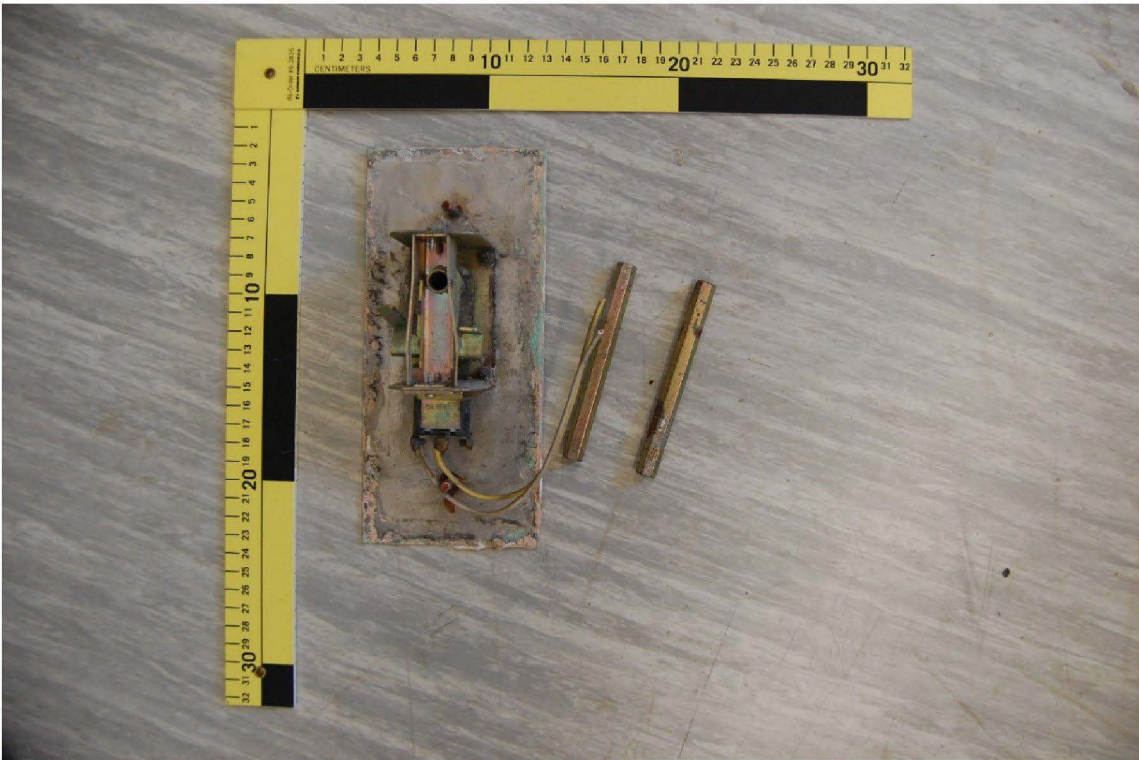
Fire control switch – BJG/74 and fixing lugs (rear view)
